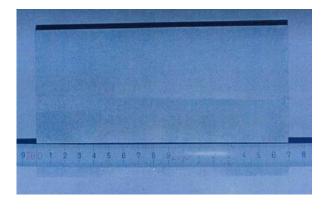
EBW on 170mm (6.7 inches) thick Al
